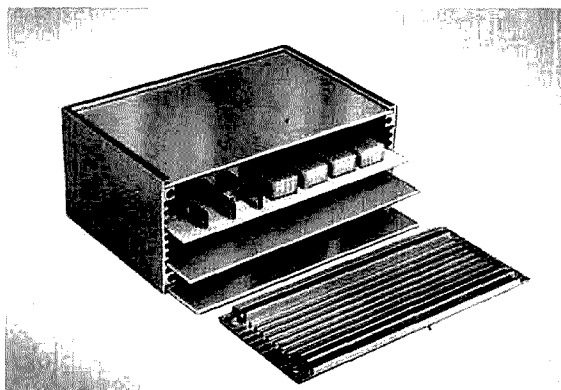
A metal case made with tightly fitting sides and end plates for EMI containment.
